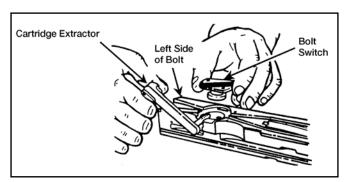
Removal of the cartridge extractor and bolt
